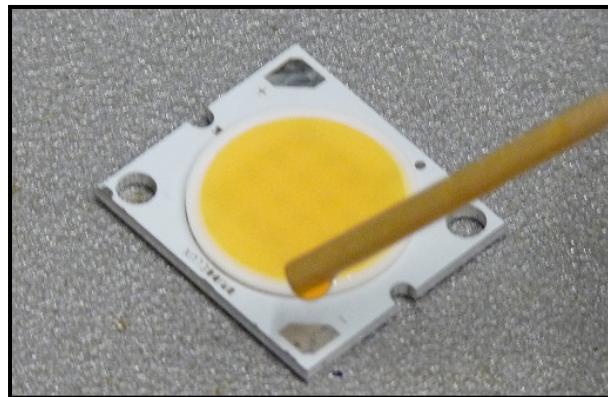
Dispensing flux onto Bridgelux LED Array solder pad
